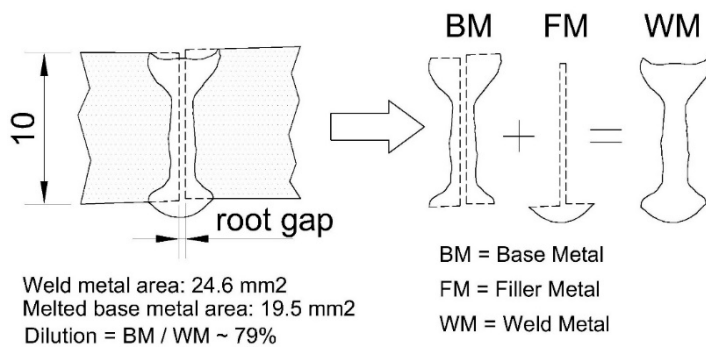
Example showing the cross-sectional area defined from the macrograph of test weld LAH1.
